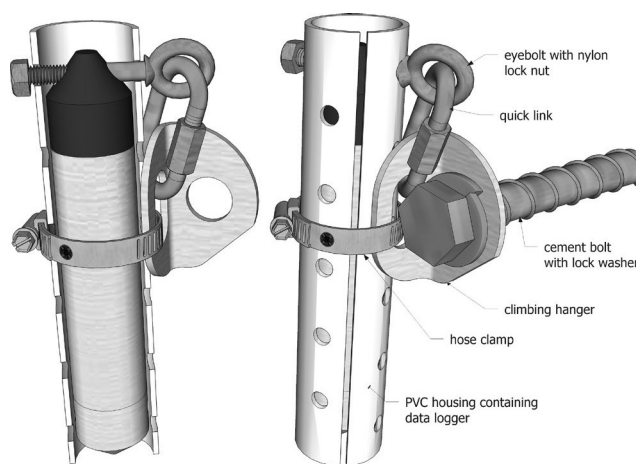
Diagram of assembled logger housing (right) and cutaway of the polyvinyl chloride housing to show eye bolt threaded through the hole in the logger cap (left)
